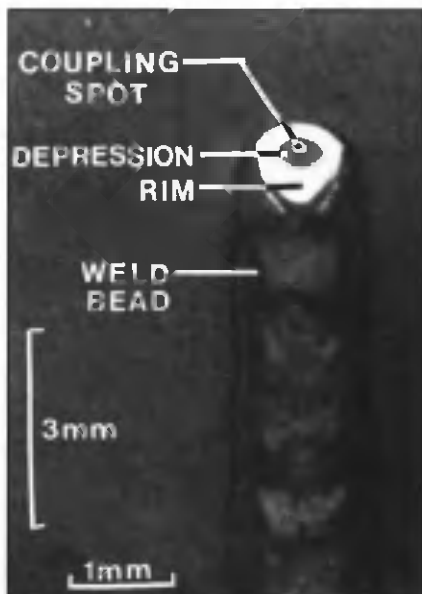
Inclined-camera image of a depressed pool from a 1.5-kW test weld (2.03 m/min) showing the coupling spot, the depression and the pool rim.
